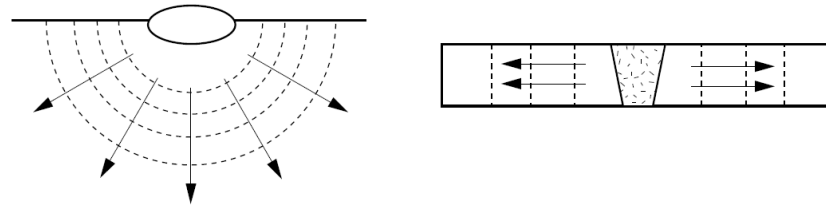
Heat flow in welding of thick and thin plates
